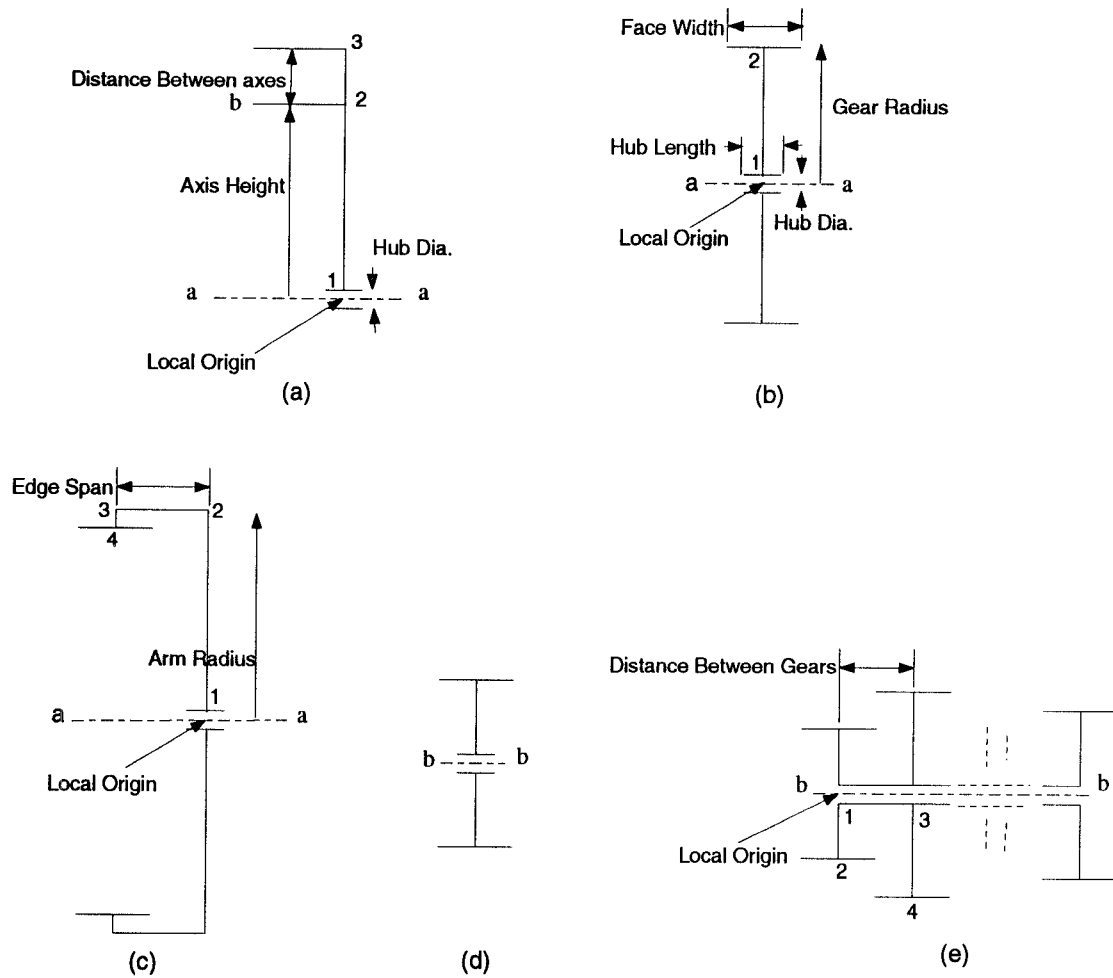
Primitives: (a)carrier, (b) sun gear, (c) ring gear, (d) single-planet gear, (e) multiple planet gear.
